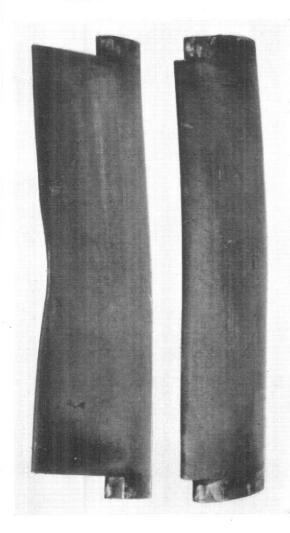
(left). Maximum acceptable buckling of nozzle blade edge.
